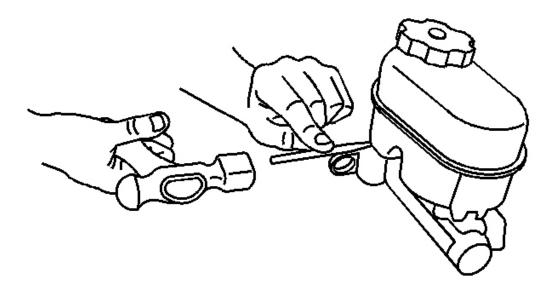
Removing/Installing Brake Master Cylinder Reservoir Retaining Pins Courtesy of GENERAL MOTORS CORP.
